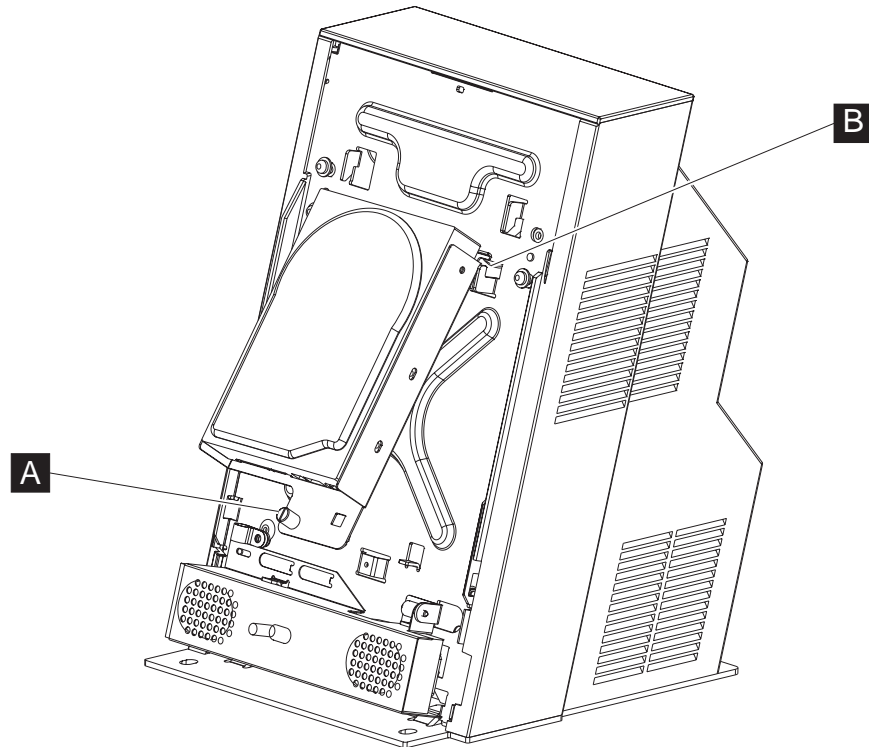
HDD installation. For clarity, this figure shows additional components removed; however you do not remove these to remove the HDD.
